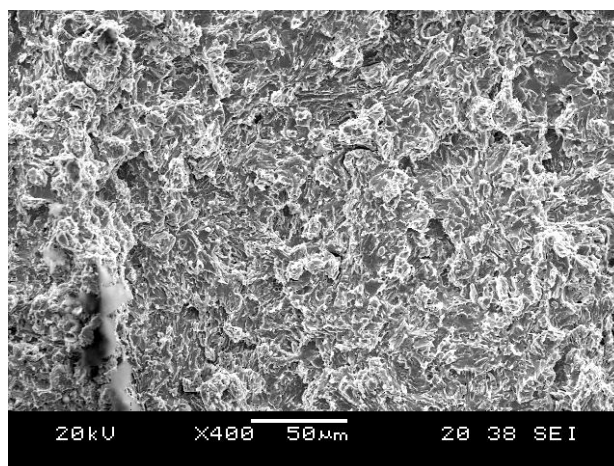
Fracture surface of brazed joint at X 400 magnification
